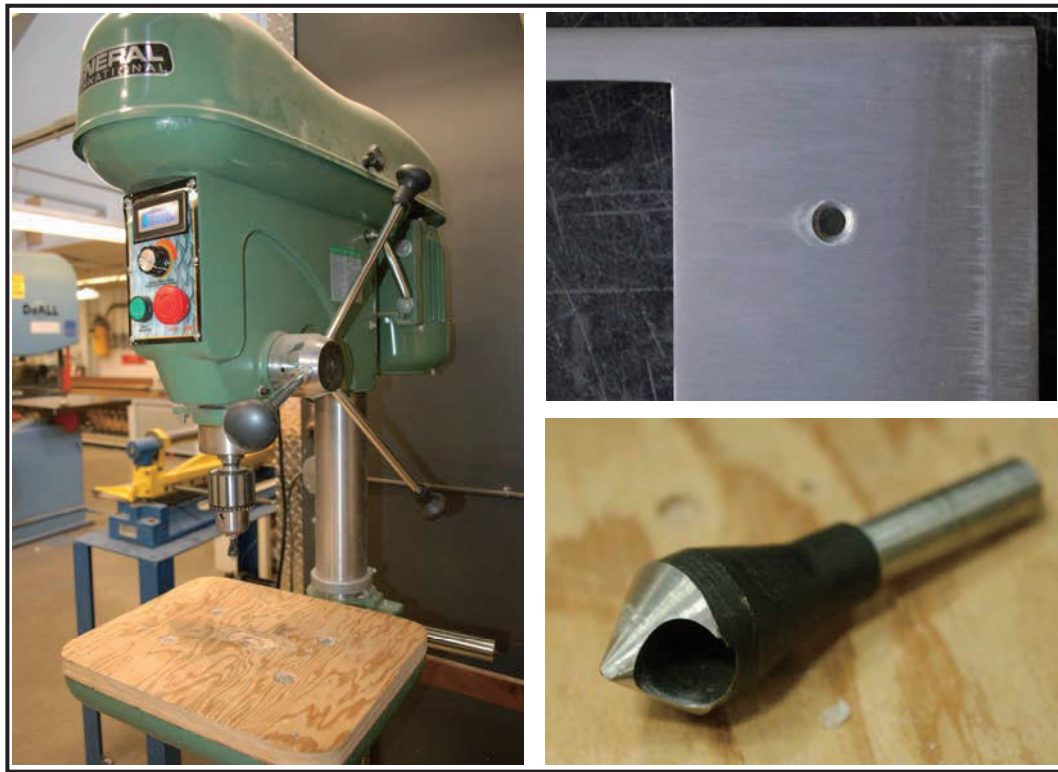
The drill press in the Fabrication Laboratory fitted with single-flute counter sink and the result on the specimen bracket. Photographs by author.
